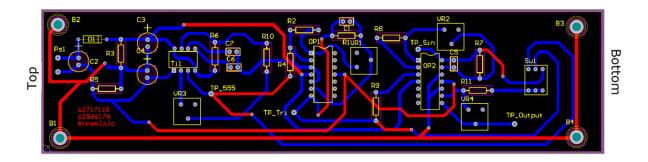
Figure of the PCB of each component position on the board as well as tracing on the bottom layer (blue) and the top layer (red).
